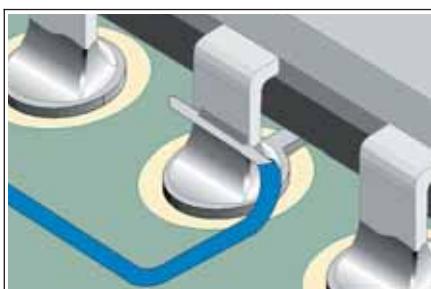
Acceptable Wire soldered to clipped lead on component side. +
